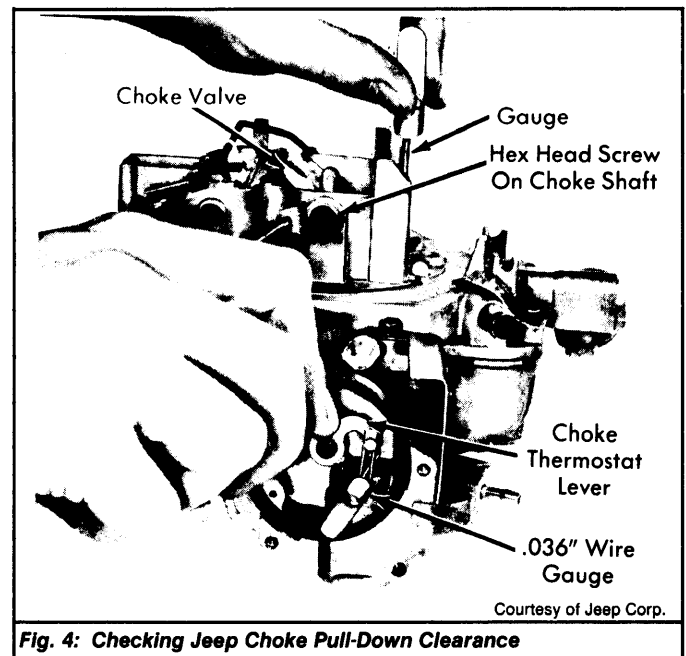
Checking Jeep Choke Pull-Down Clearance
